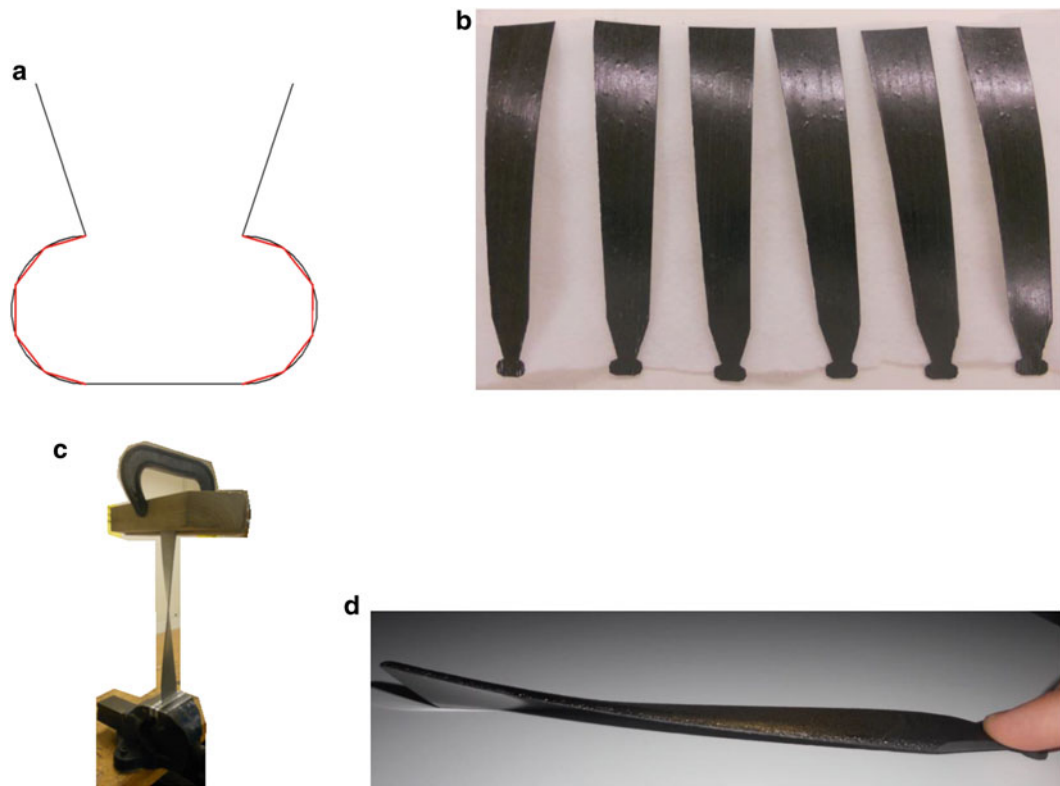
Blade manufacturing steps. Blade root profile in (a). Unidirectional pre-pregs in (b). Tooling plate in (c). CRFP blade in (d)
